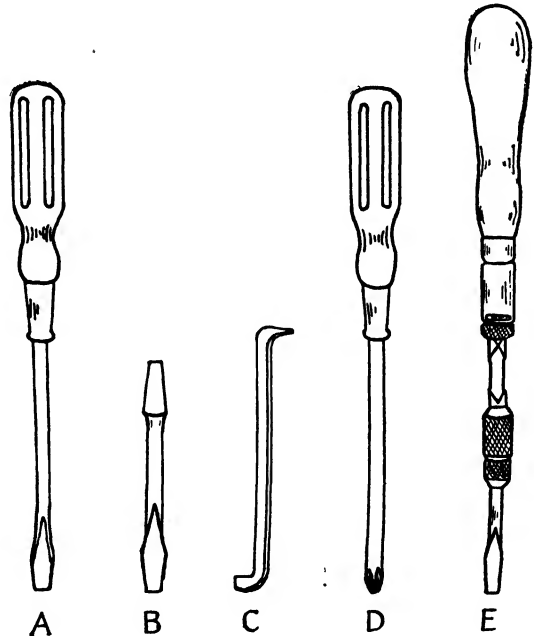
Types of screw drivers: A, standard screw driver; B, screw-driver bit; C, offset screw driver; D, Phillips screw driver; E, spiral-ratchet screw driver.
